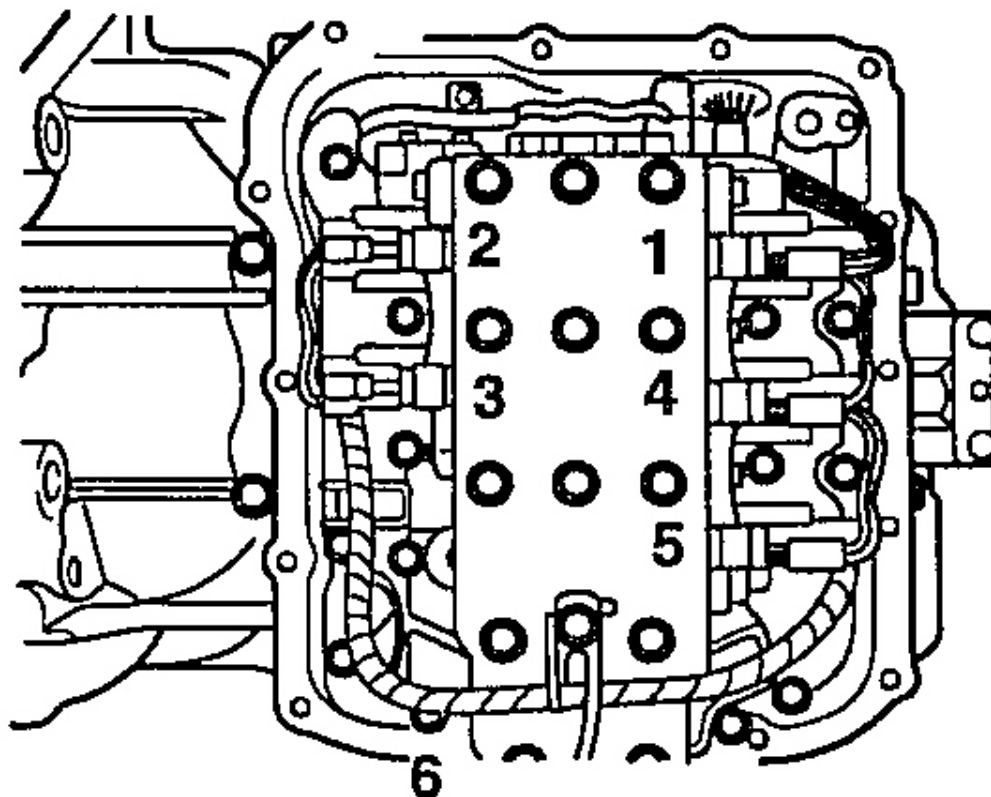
Installing Valve Body, Gasket & Steel Balls
